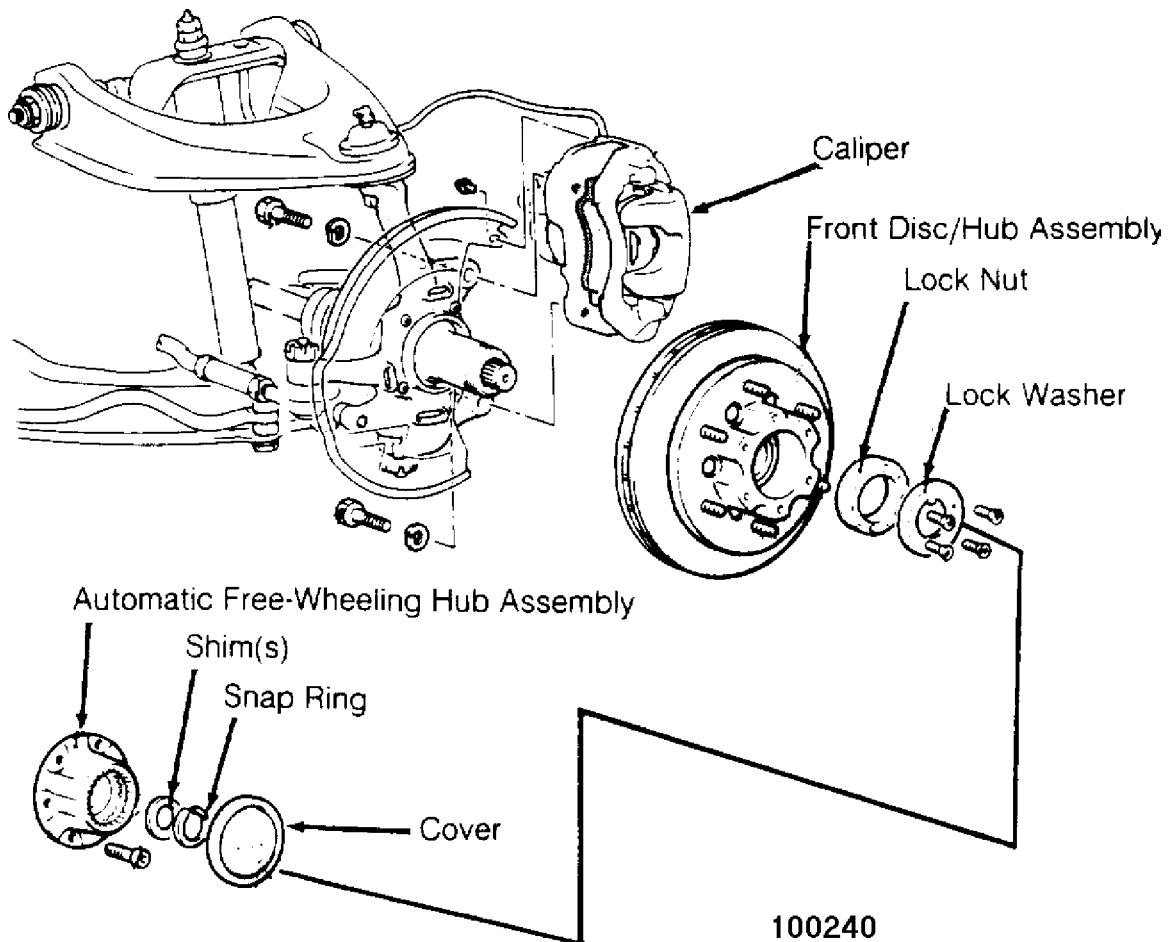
Exploded View Of Front Brake Assembly (Pickup 4WD & Ram-50 4WD)
